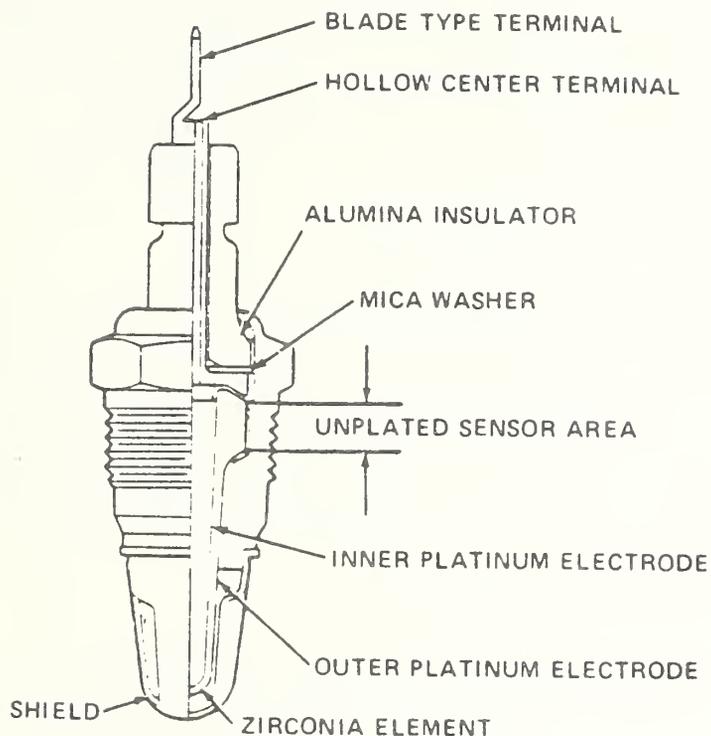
EXHAUST OXYGEN SENSOR
